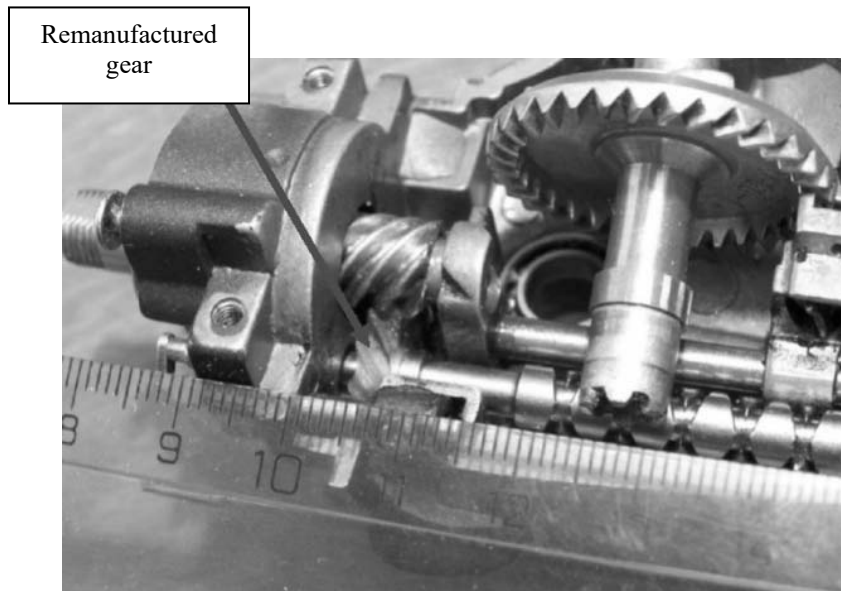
Remanufactured gear assembled in fishing reel [9, 10].
